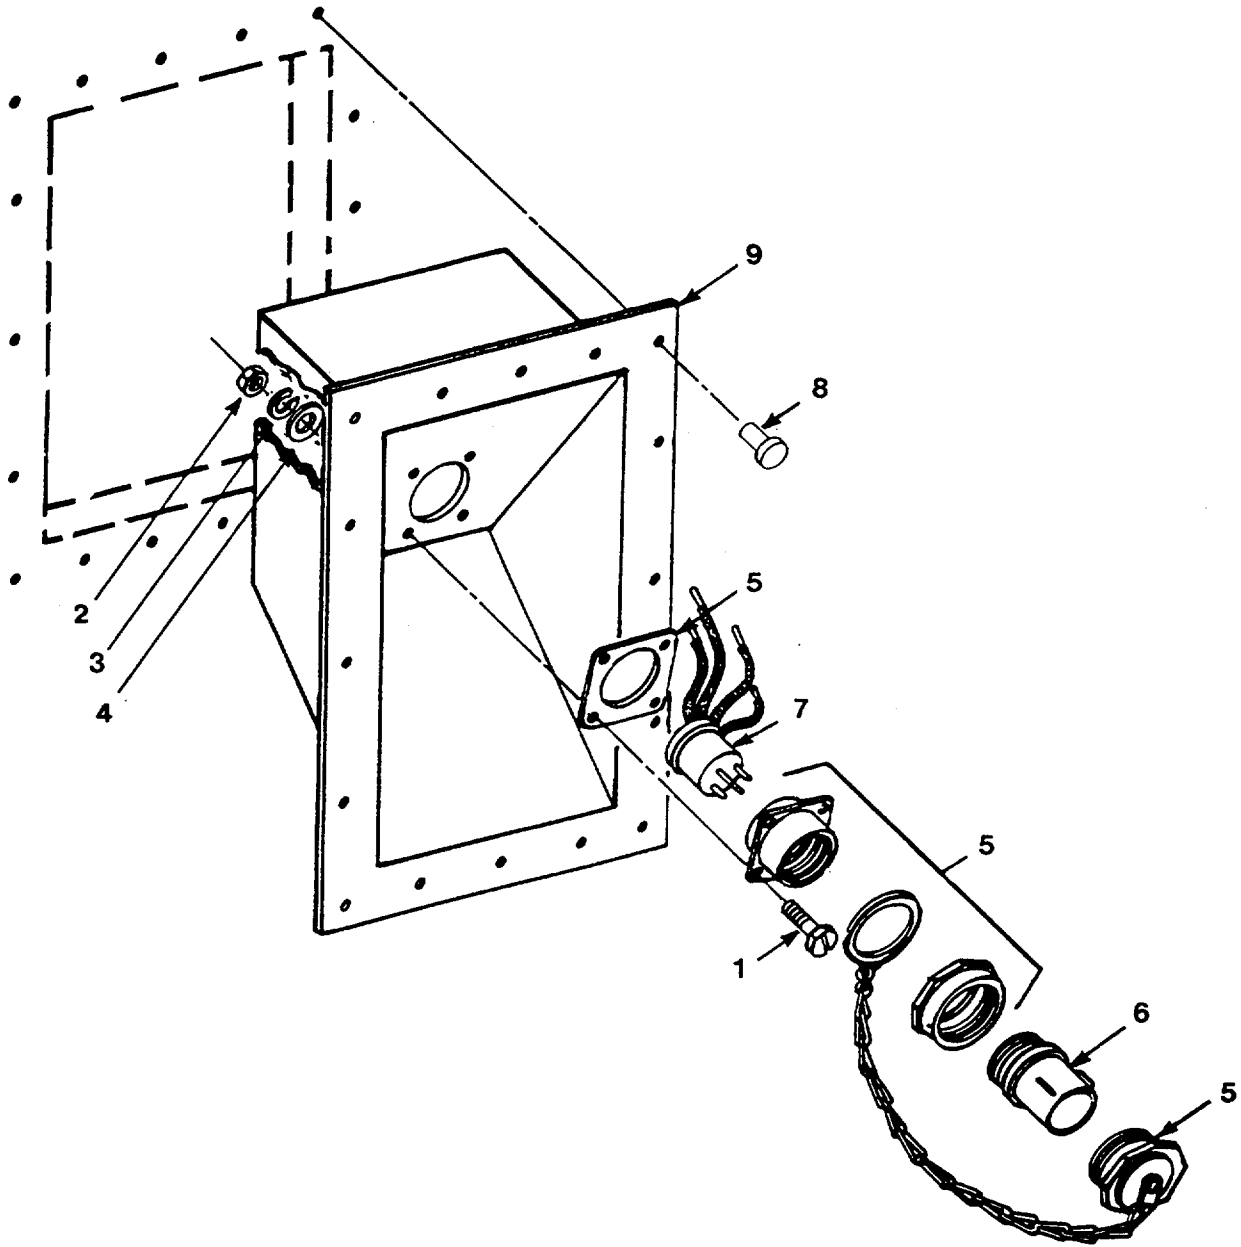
Main Power Receptacle Assembly (Sheet 1 of 2)
